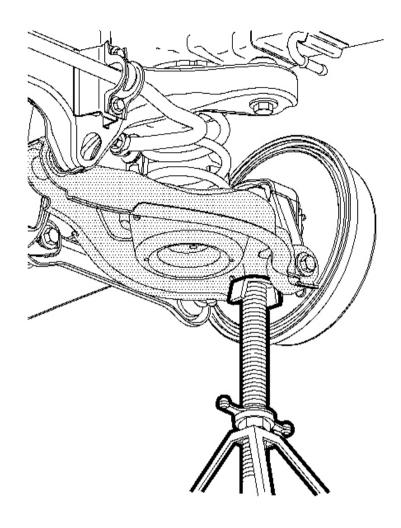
Jackstand Supporting The Lower Control Arm Courtesy of GENERAL MOTORS CORP.
